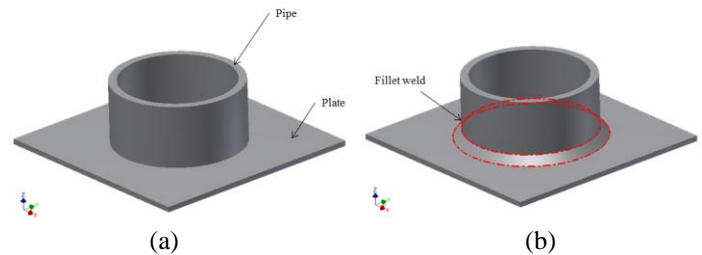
(a) Geometry considered of a plate and pipe without weld, (b) Geometry considered of a plate and pipe with fillet weld
